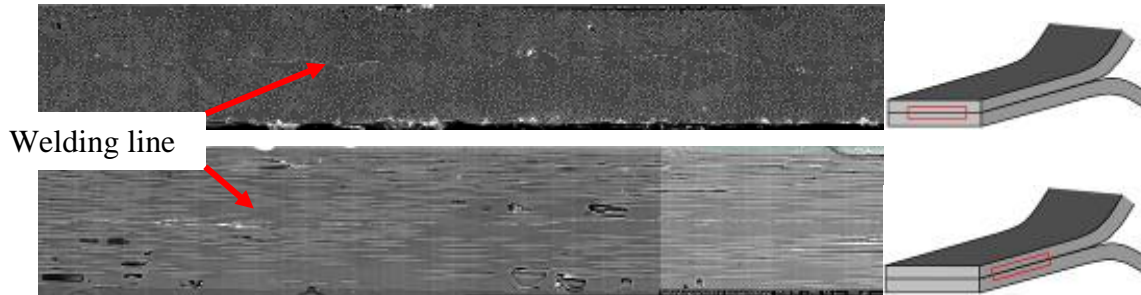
Cross section after welding perpendicular (upper one) and parallel (lower one) to welding direction
